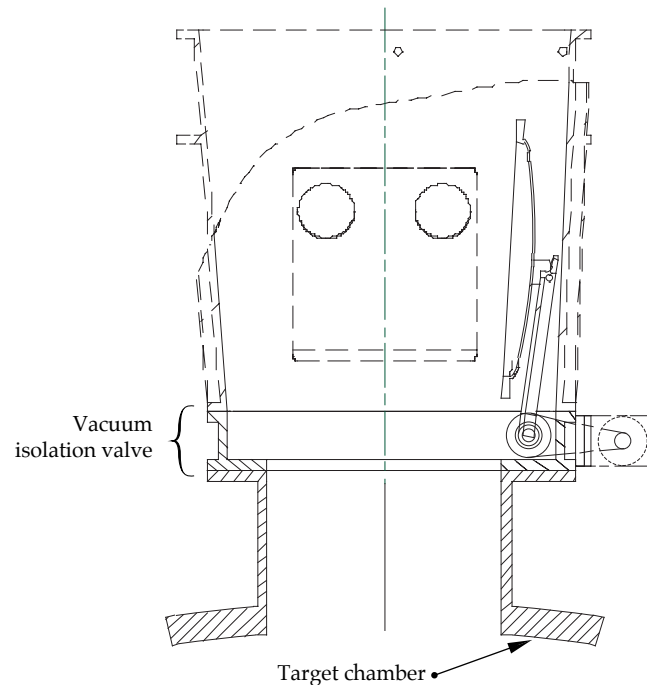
The vacuum isolation valve interfaces directly with the target chamber. (40-00-1097-2271pb01)
